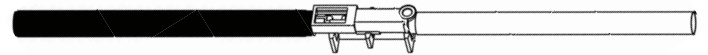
Hydraulic assembly: Includes cylinder tube, pump body, and black bladder tube
